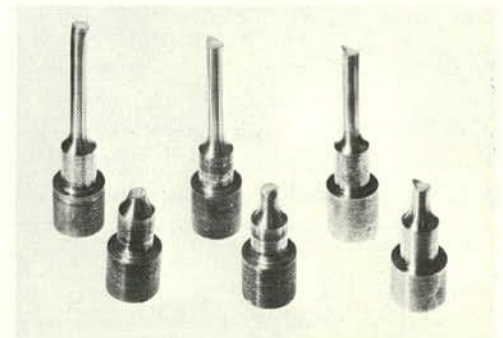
Fatigue Fractures of Machined Bar Specimens
